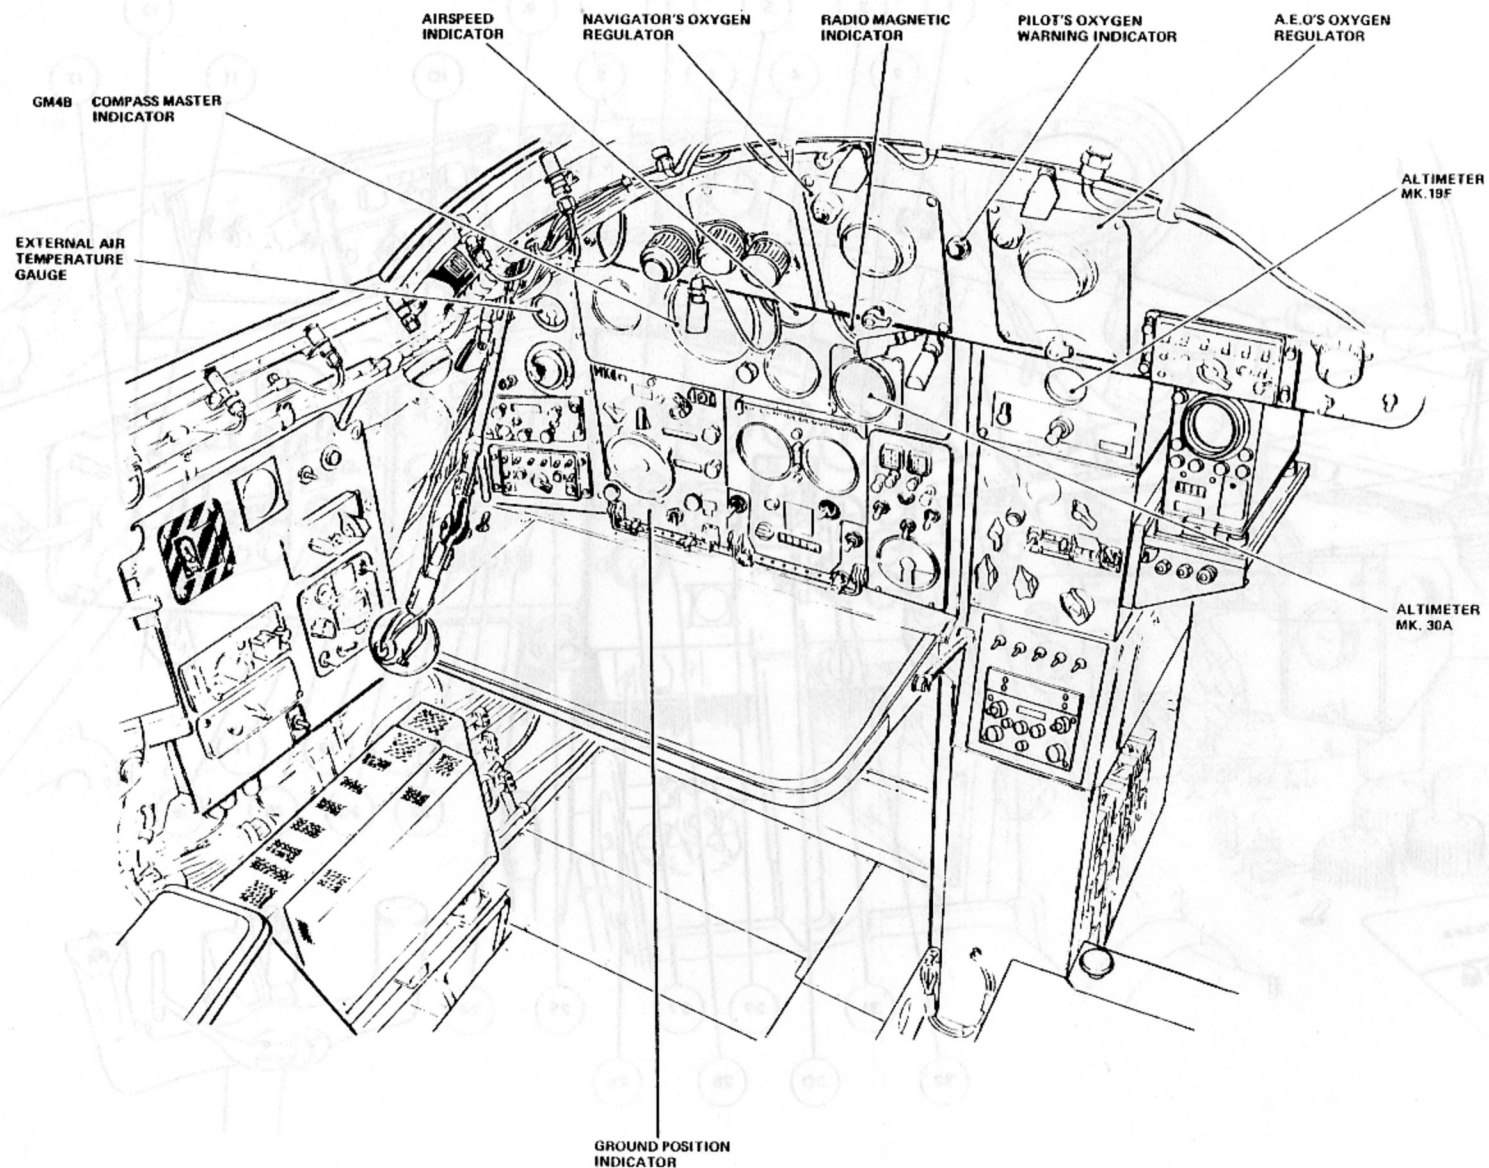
INSTRUMENT INSTALLATION-NAVIGATOR'S STATION
